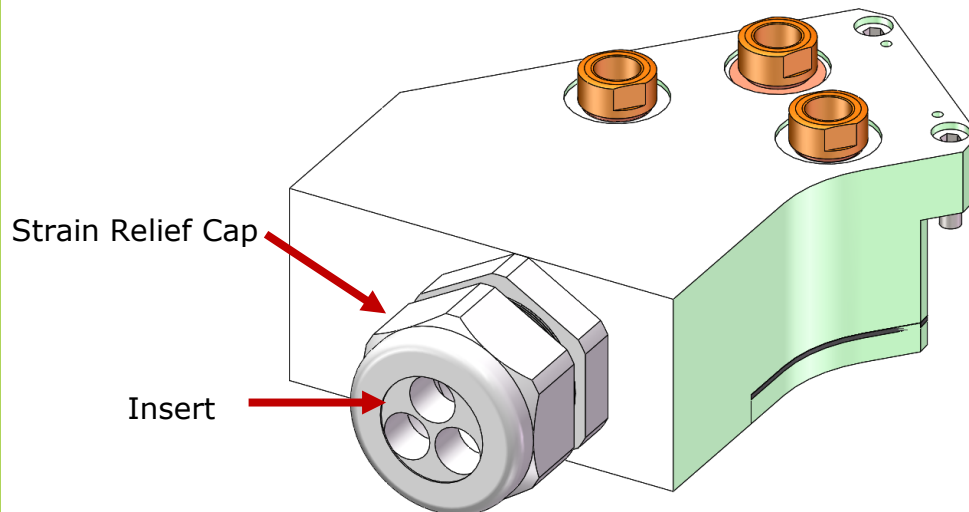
Remove/Install Strain Relief Cap and Insert
